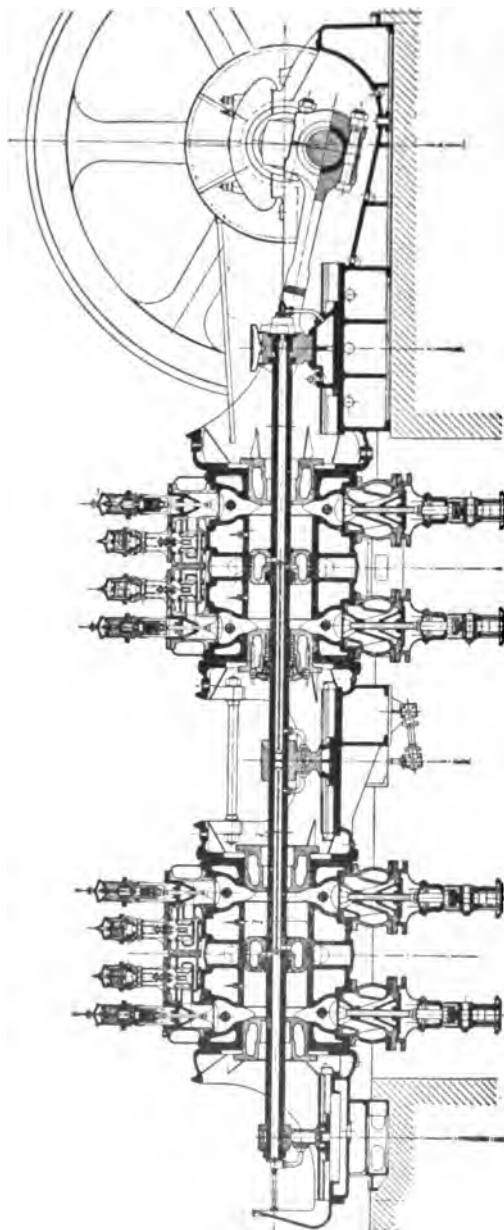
Nürberg Double-acting Tandem Gas Engine.
